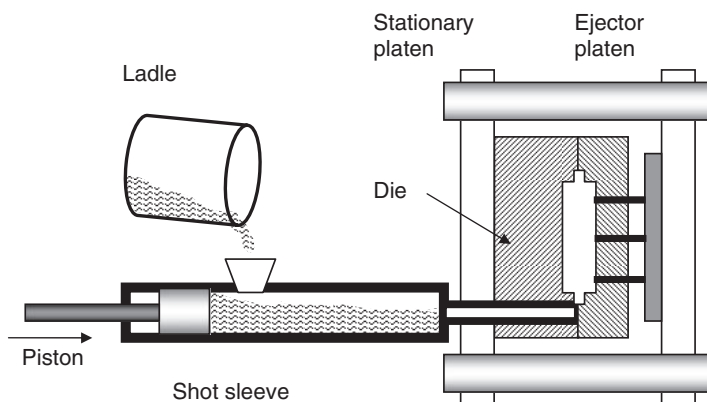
The graphical illustration of a cold chamber die-casting machine
